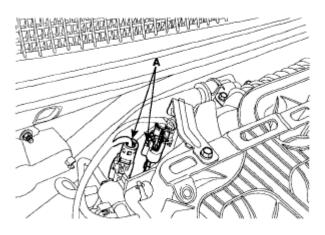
Identifying Fuel Hose And PCSV Hose Courtesy of HYUNDAI MOTOR CO.
